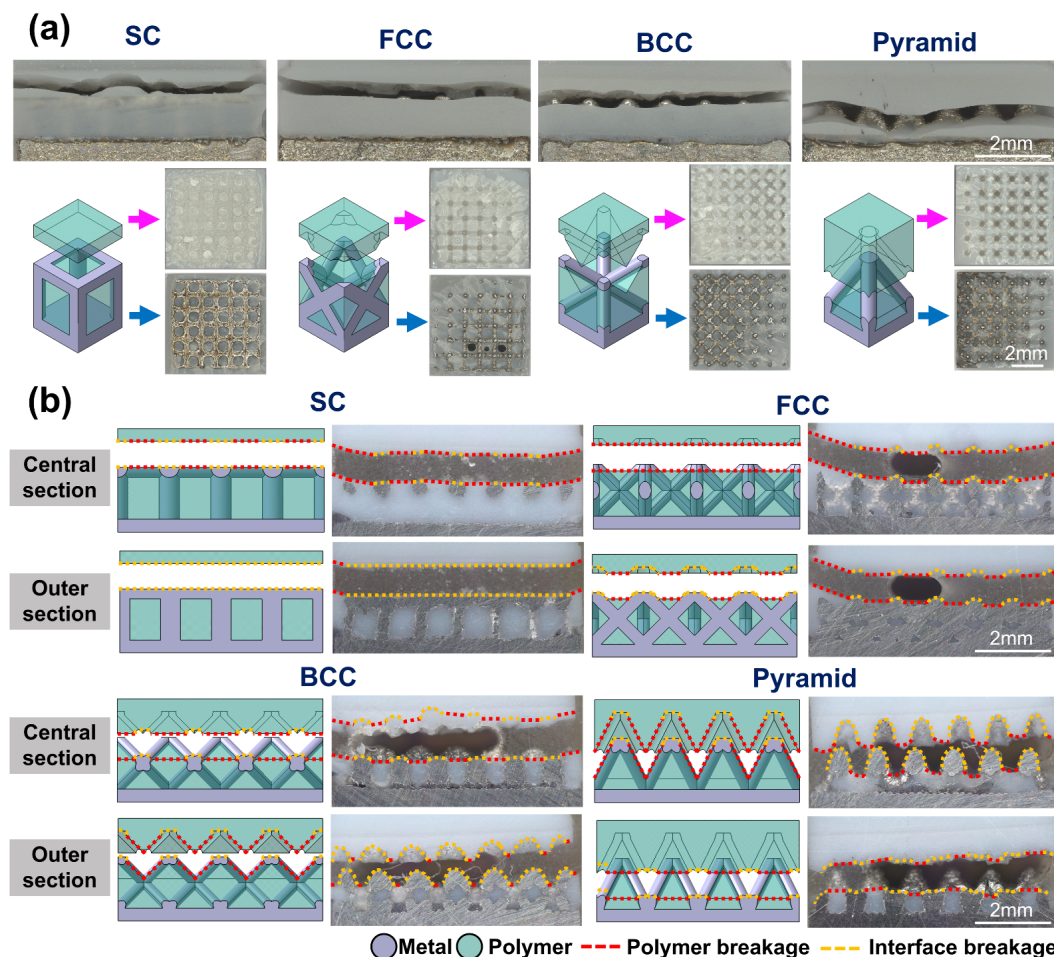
Geometry-dependent fracture behavior of the hybrid interfaces after tensile testing. (a) Representative side and top views of the fractured hybrid specimens, showing that the fracture morphology varied with lattice geometry. (b) Cross-sectional observations of the fracture paths in the interlocking region, indicating that face-centered cubic (FCC) and body-centered cubic (BCC) promoted more tortuous crack propagation, whereas simple cubic (SC) and pyramid provided less favorable fracture routes. Scale bars: 2 mm; magnifications: 50 $\times$.
